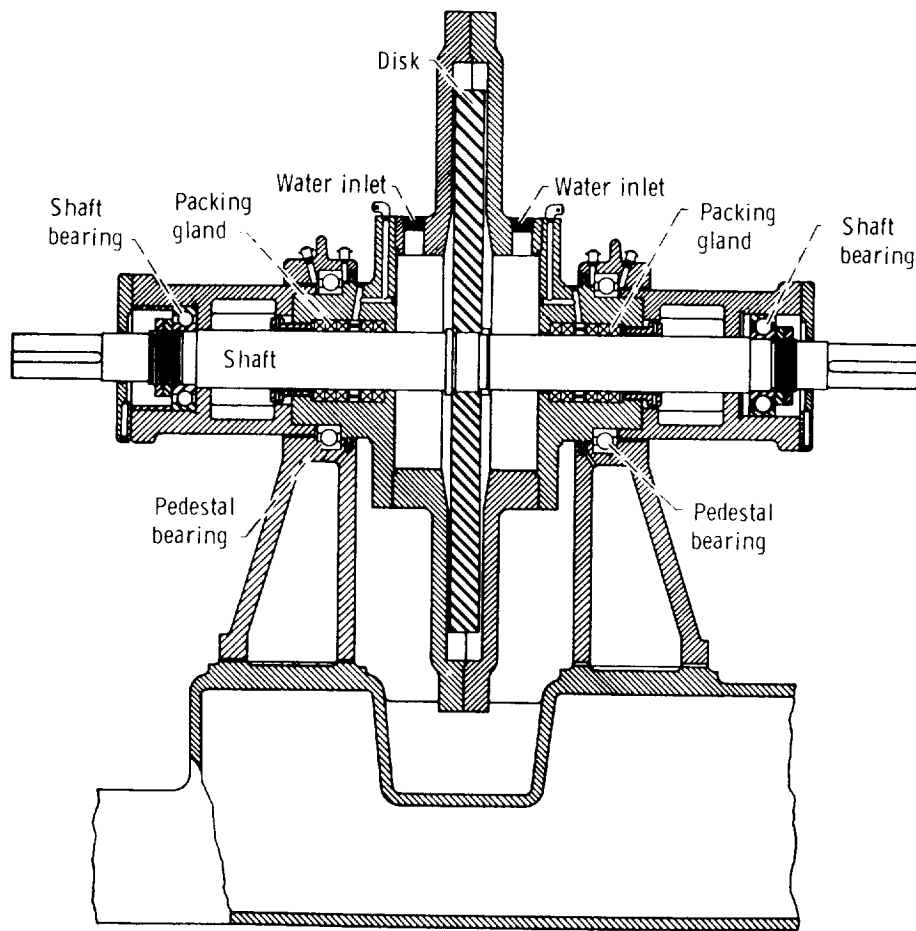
Hydraulic dynamometer. (Courtesy of Murray Iron Works Co.)
